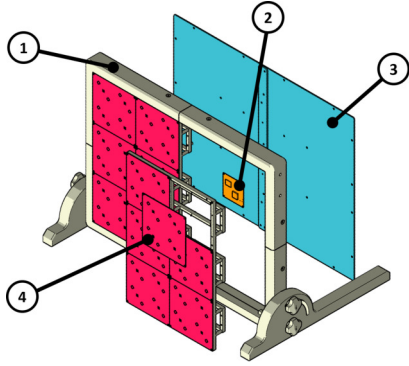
CAD exploded view of the TechPAD and its main components: outer support frame (1), module command board (2), steel support plates (3) and sensing/actuators module (4).
